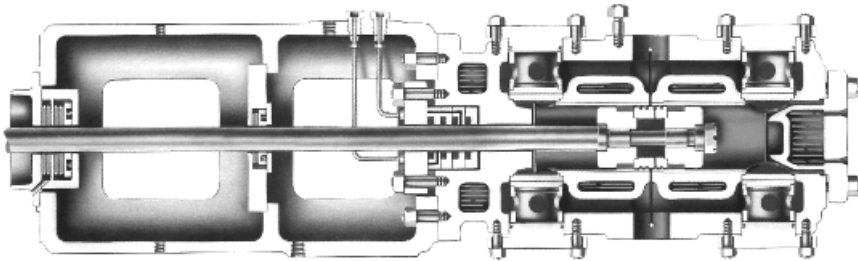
Medium- or high-pressure double-acting cylinder with a flanged liner. The liner is locked in place by a flange between the head and the cylinder barrel. A two-compartment distance piece designed to contain flammable, hazardous, or toxic gases is illustrated. (*Dresser-Rand Company, Painted Post, N.Y.*)
